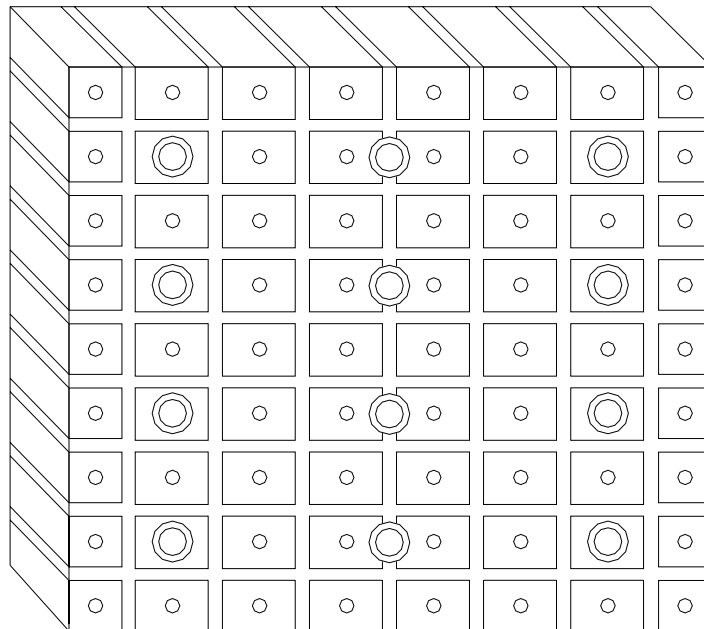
A grid plate with holes which can be used as a machine table.
